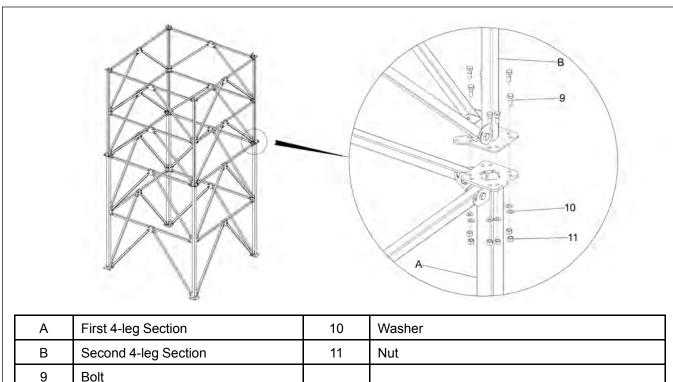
Stacking the 4-leg (Warren Bracing) tower sections
